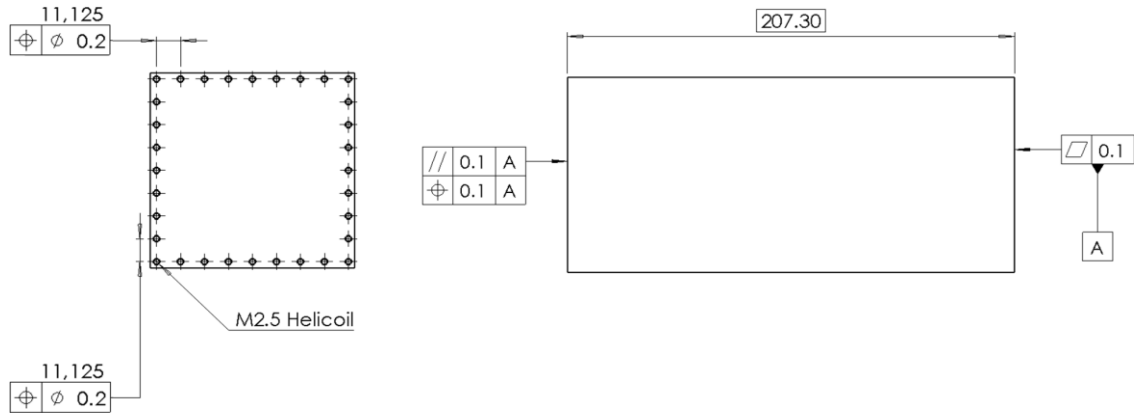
Wall to Wall Dimension and Tolerance specifications for internal secondary structures
